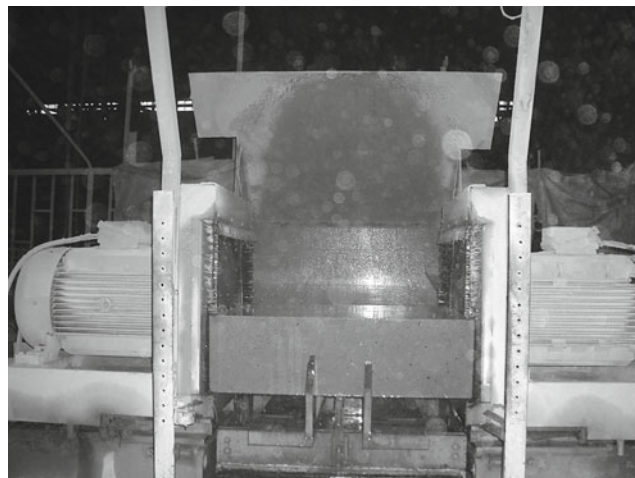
Grinding ShSU-33 fireclay block No. 1 on the Wasser grinding machine.
